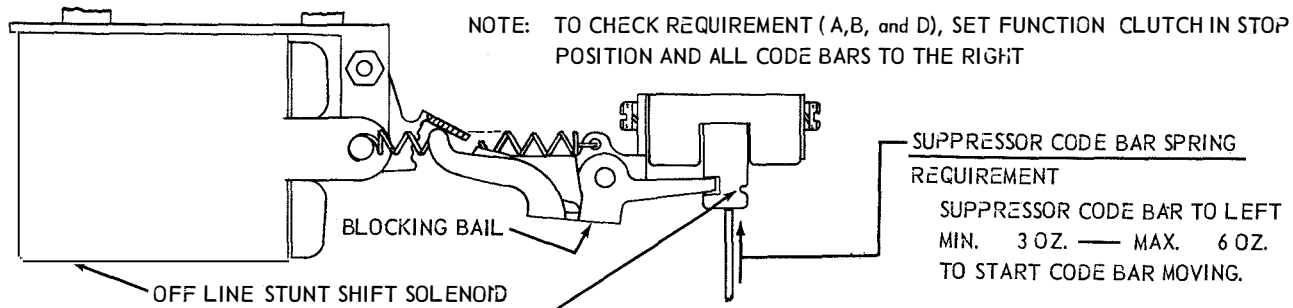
TYPER, CLUTCH MECHANISM, LEFT SIDE VIEW
